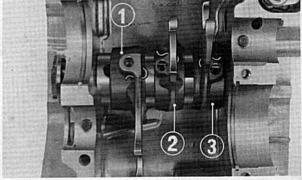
(1) Right gearshift fork (2) Center gearshift fork (3) Left gearshift fork
